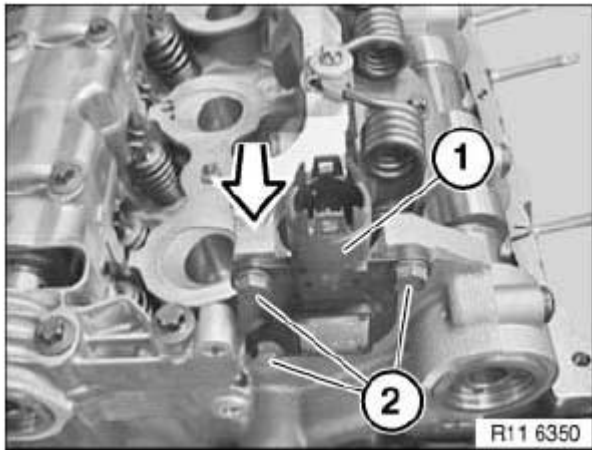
Identifying Eccentric Shaft Sensor And Mounting Screws
